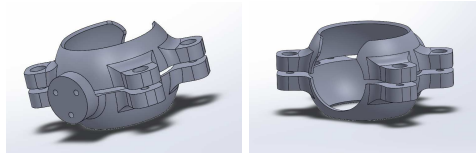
Solidworks CAD of adapter to attach the sensor to the handle of the Falcon
